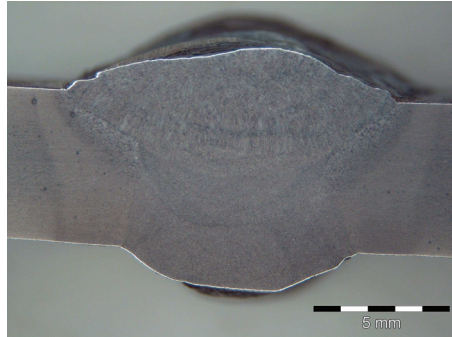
Macrostructure of welded joint of API 5L X52 steel
